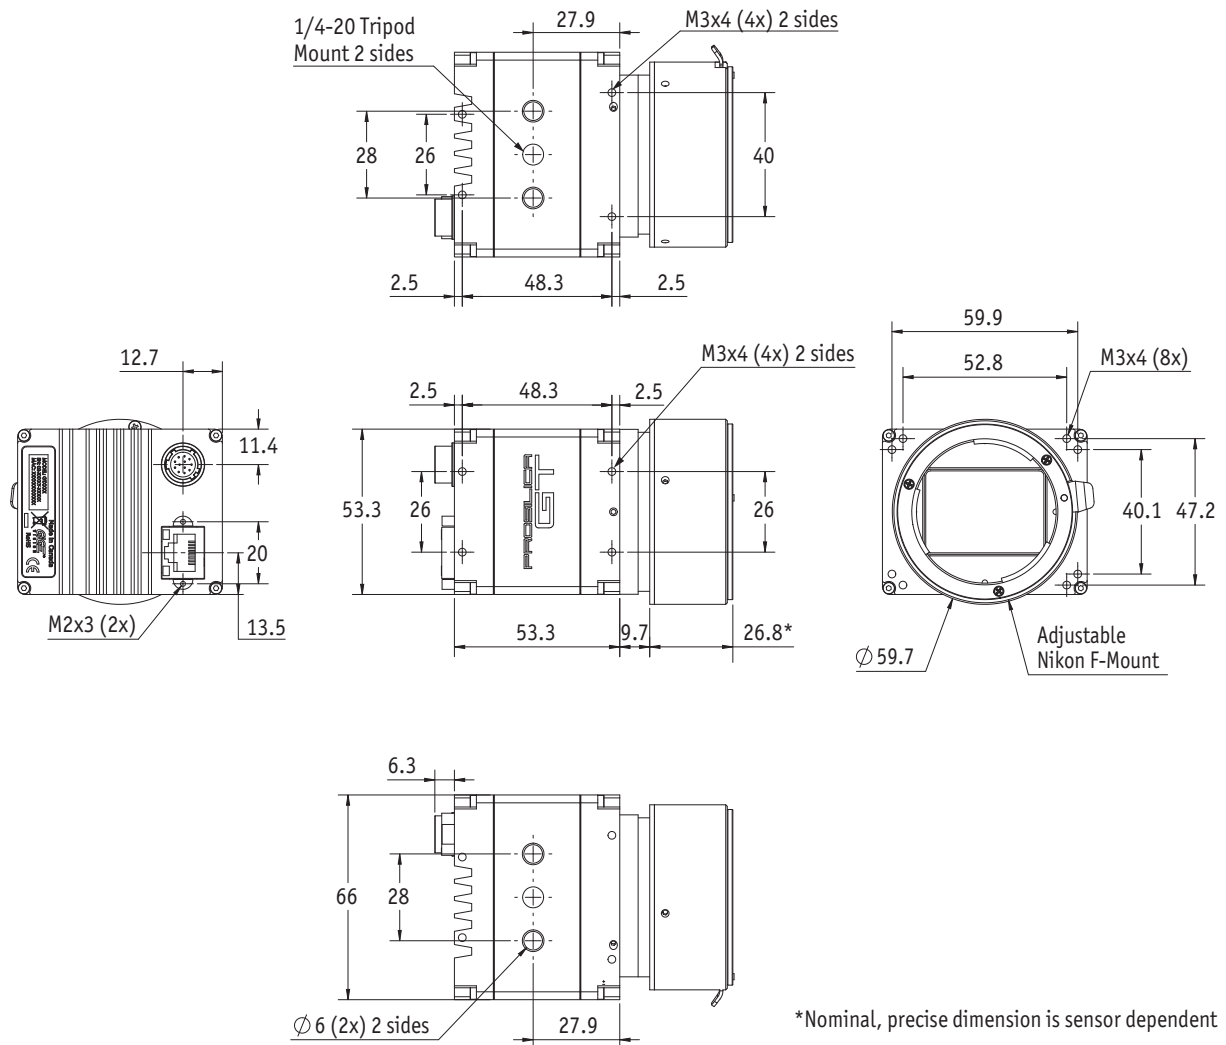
Mechanical dimensions for F-Mount Prosilica GT large format cameras.
